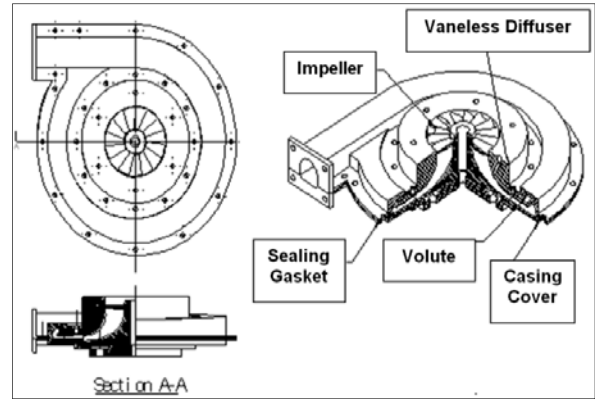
Schematic diagram of the centrifugal compressor assembly.
